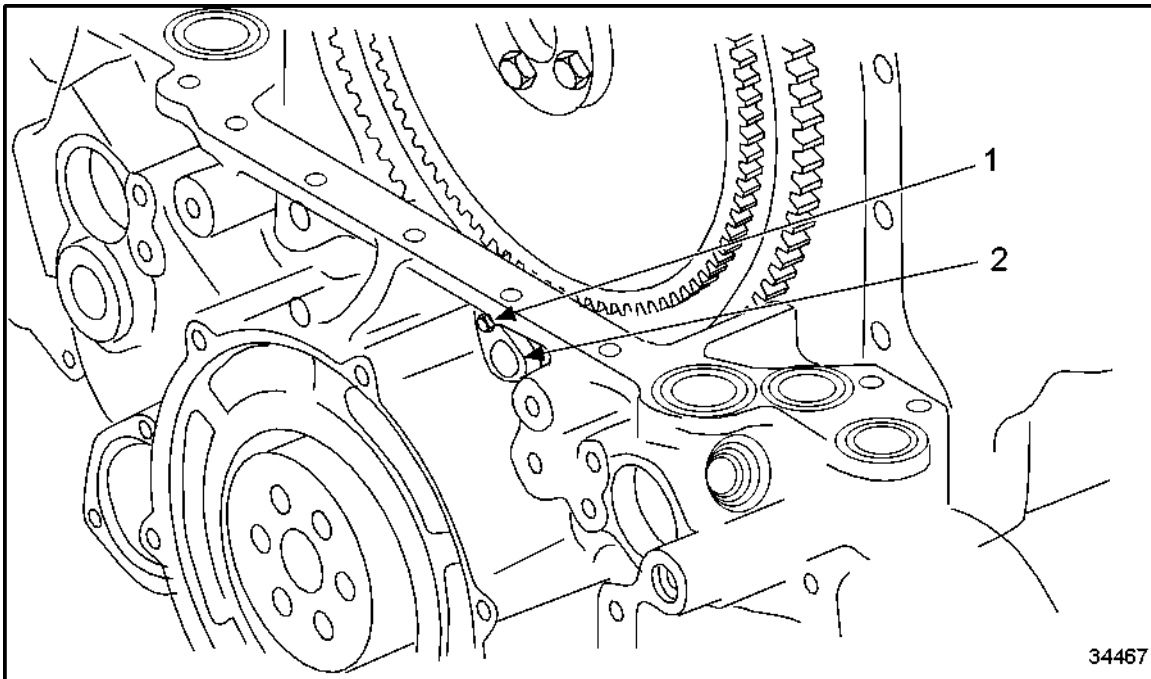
Removing Camshaft Thrust Bearing (Marine only)
